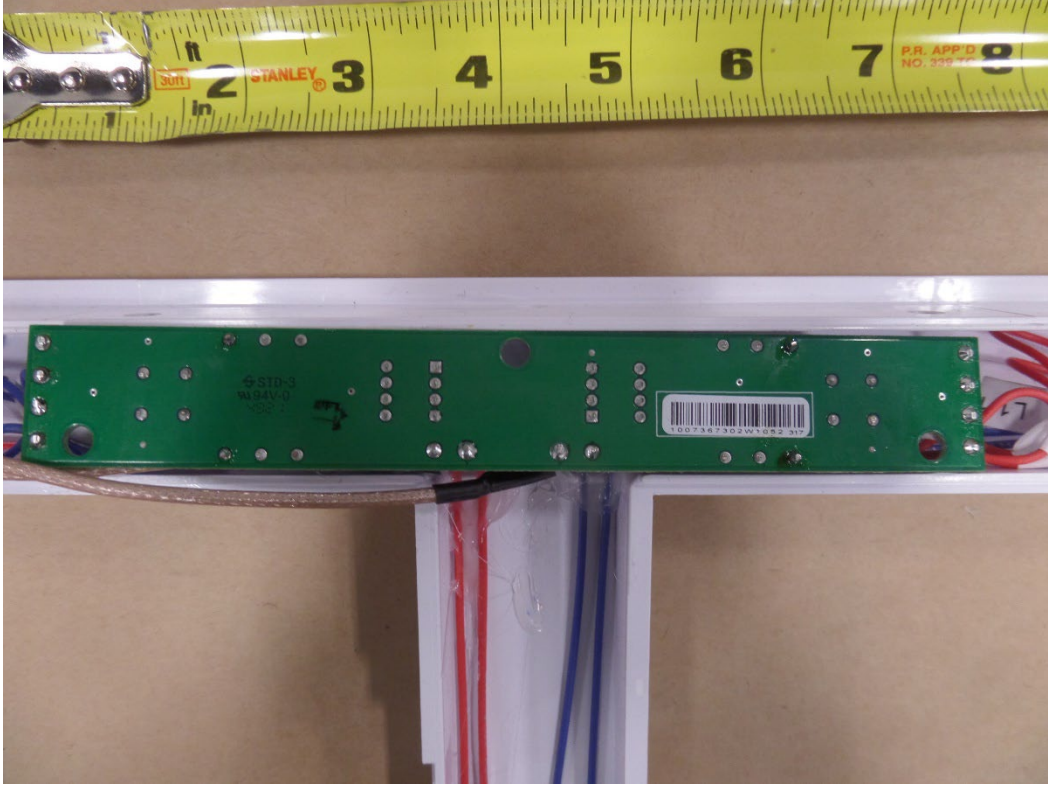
NP22 PRI/PAB/SAB RF ANT FRAME MATCHING BOARD BOTTOM SIDE
